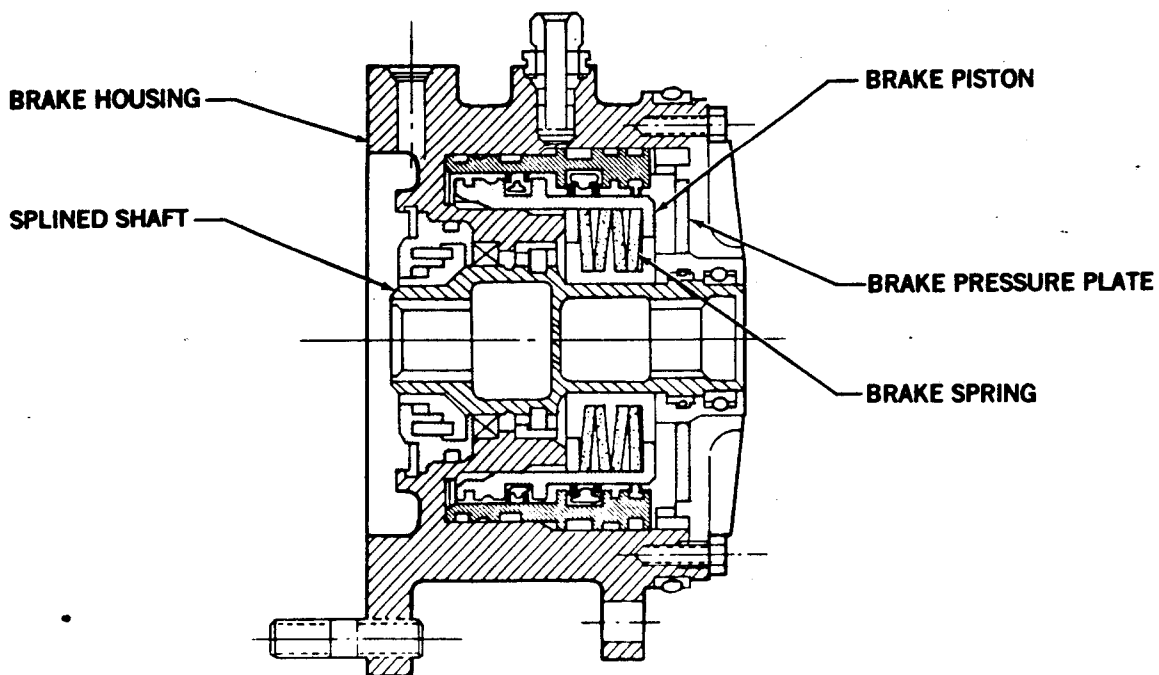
HYDRAULIC MOTOR BRAKE ASSEMBLY
